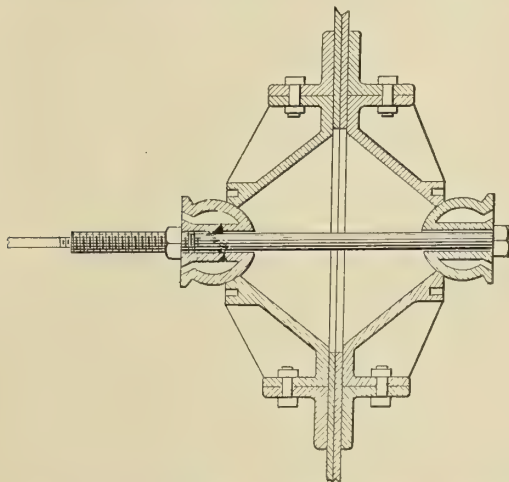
Ball and Socket Bolts to Facilitate the Alinement of Ship Sections Being Joined
